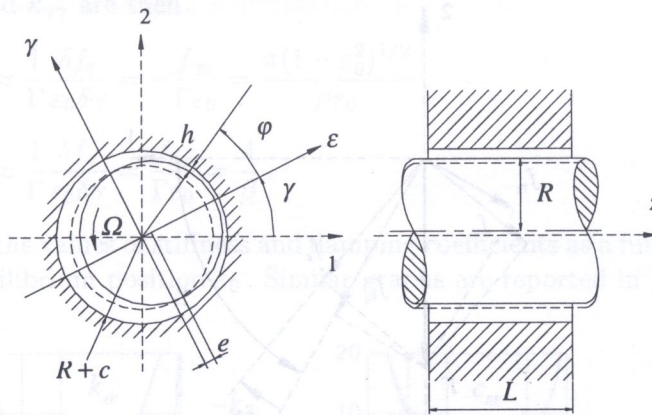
Clearance geometry of fluid-film cylindrical bearing
